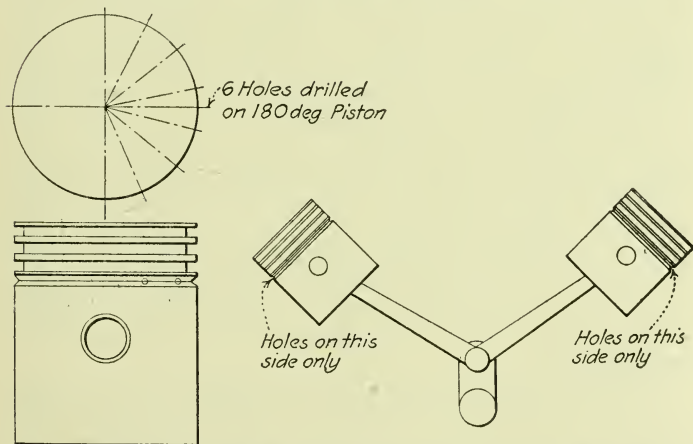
DRAWING SHOWING THE LOCATION OF OIL HOLES ON A V-TYPE ENGINE
